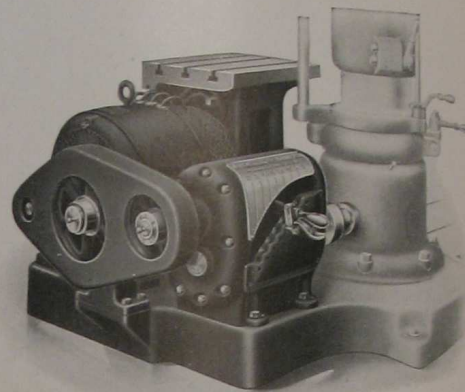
Constant Speed Motor Drive thru Speed Box.
